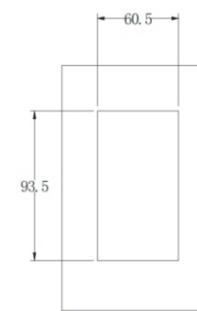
External Keyboard with Tray Installation Cutout Dimensions
